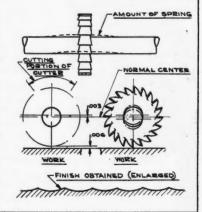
A sprung arbor will cause poor work and excessive tool wear.
